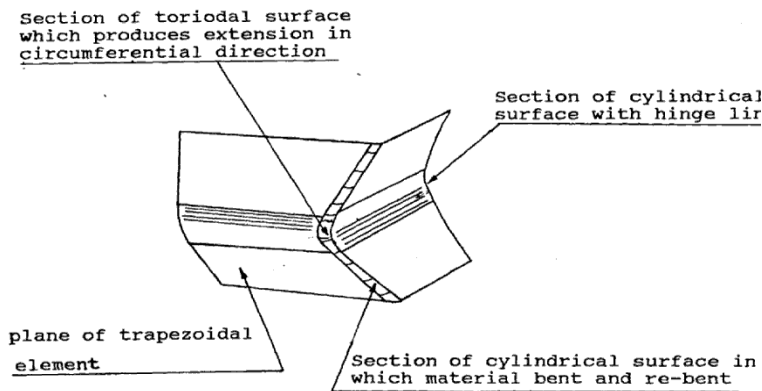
Construction of the basic fold mechanism of a quadrant square tube under axial compressive load.
